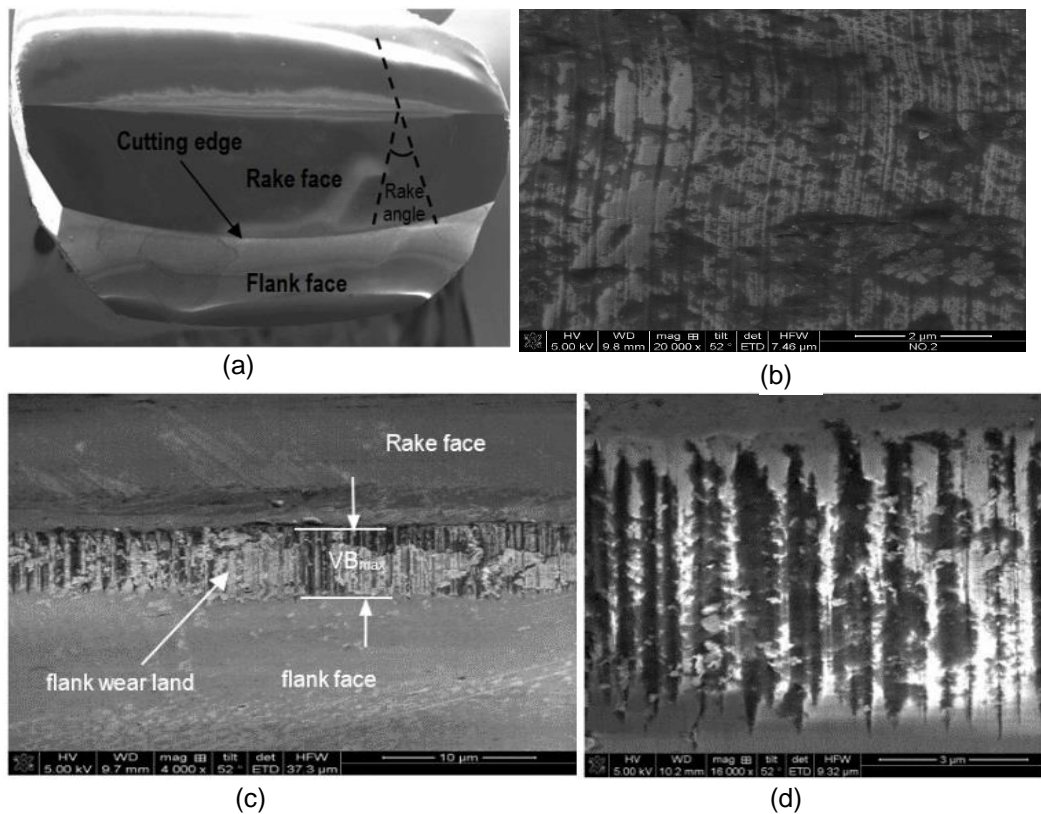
SEM images of diamond tool (a) new tool (b) flank wear (after cutting distance of 5 km) (c) Final tool wear when brittle fracture appeared on silicon surface (d) zoomed image of (c) shows groove and abrasive wear mechanism
